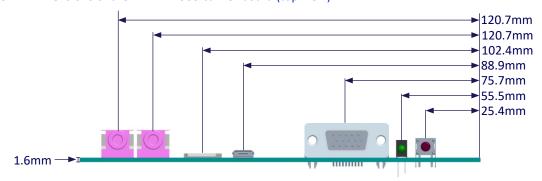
External I/O dimensions of the VIA VAB-935 carrier board (front panel)
